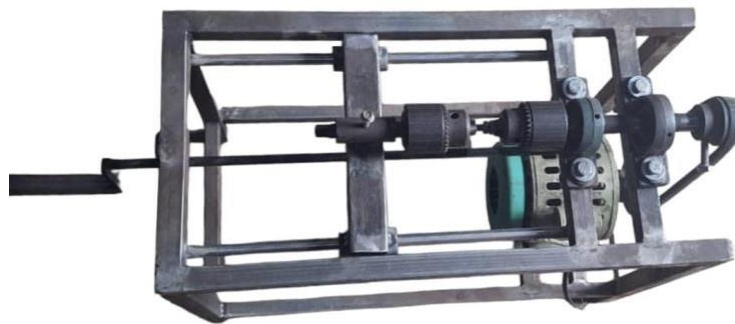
Rotary Friction Welding By Using Steel Pipes
